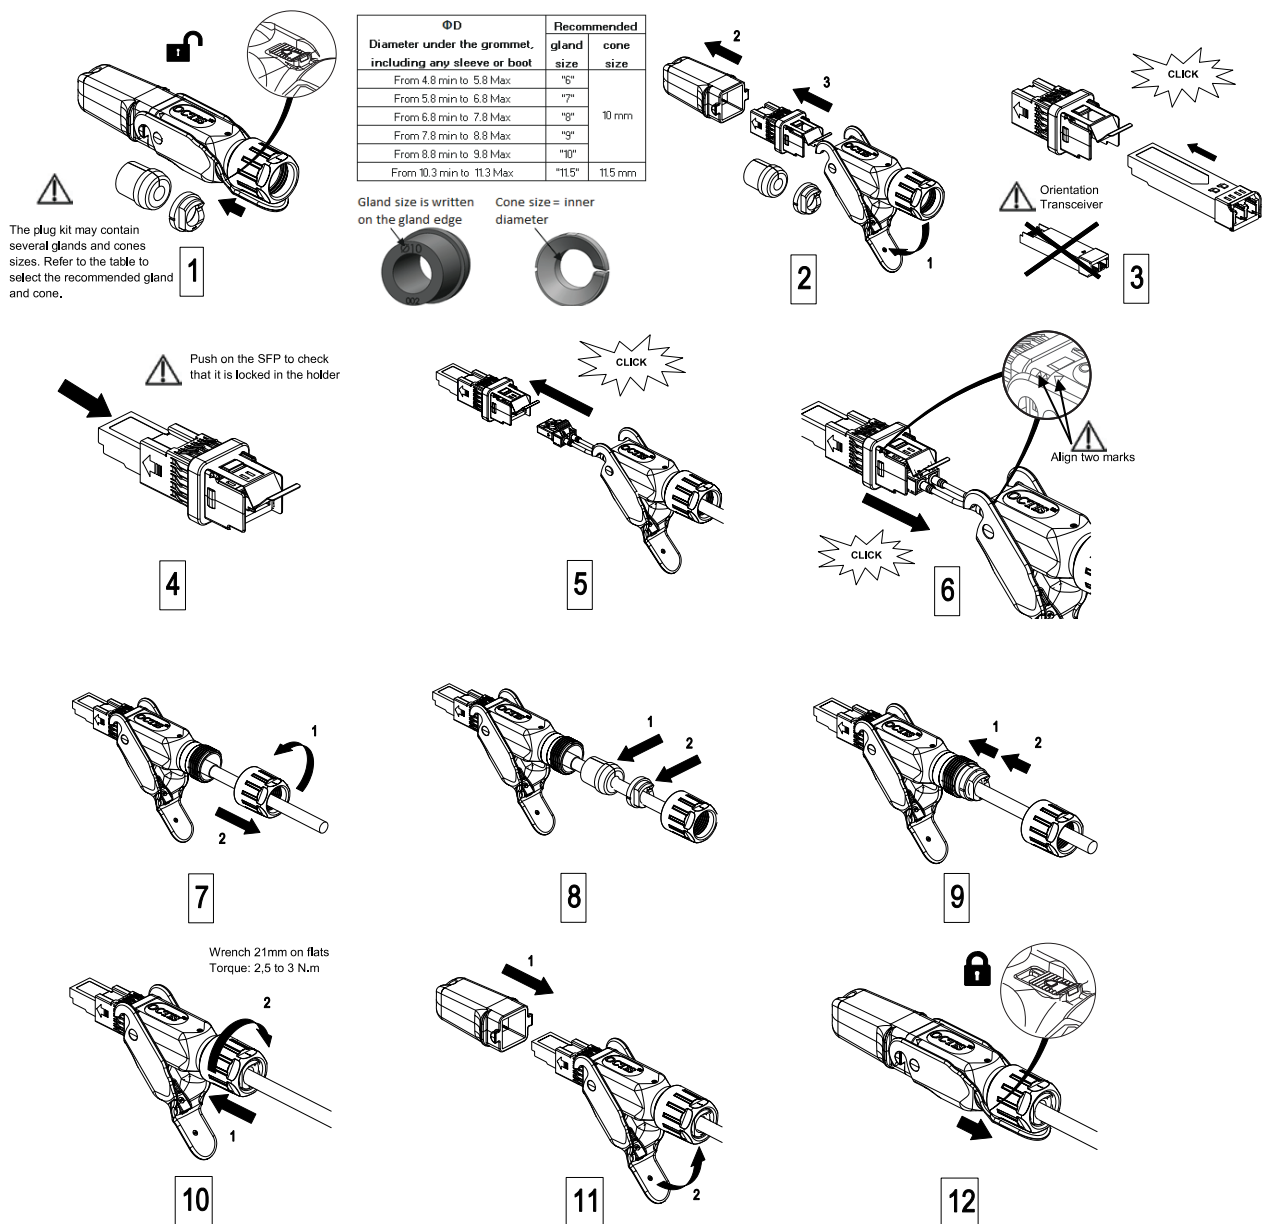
OCTIS SFP+ Reverse Lever Assembly Instructions (PN: 7770612)
